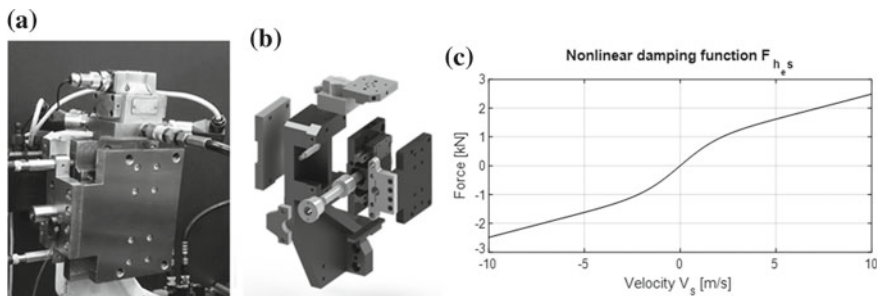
a The experimental test stand b exploded CAD view c damping function
